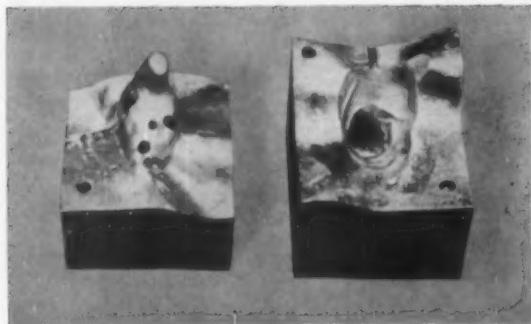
Beryllium copper mold with irregular parting line. Hot hobbing technique allows perfect match of parting line.
